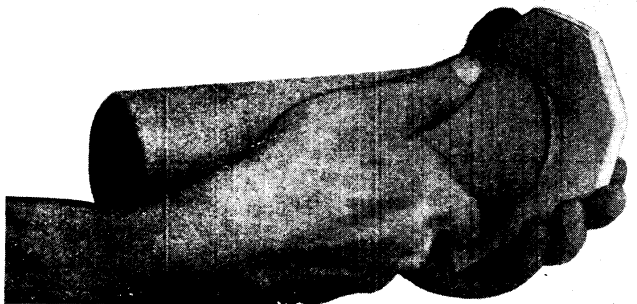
After the recess is made, the cardboard tube is held as shown and gently pushed home, care being taken not to apply such force as to damage the tube
